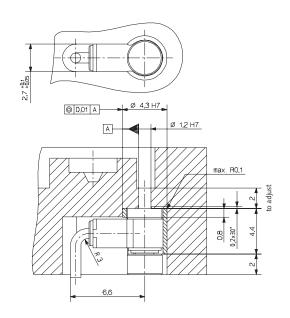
Mounting with spacer sleeve (Art. No. 3.050.262) and thrust washer (Art. No. 3.211.586)
